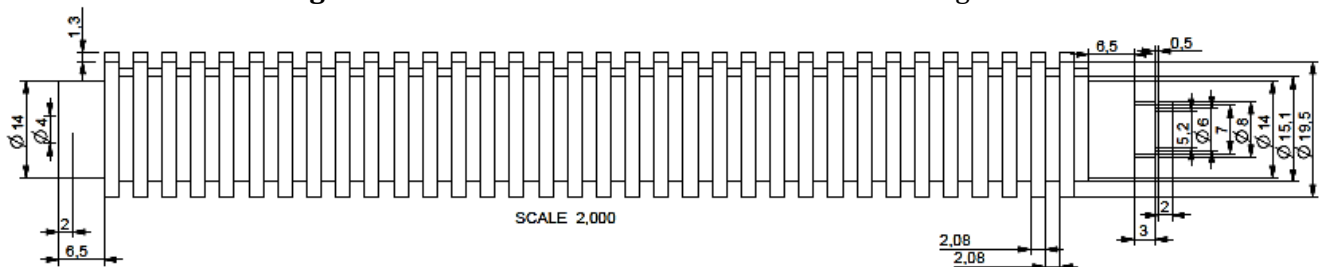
Sectional view of the 60mm chinchin cutting shaft
